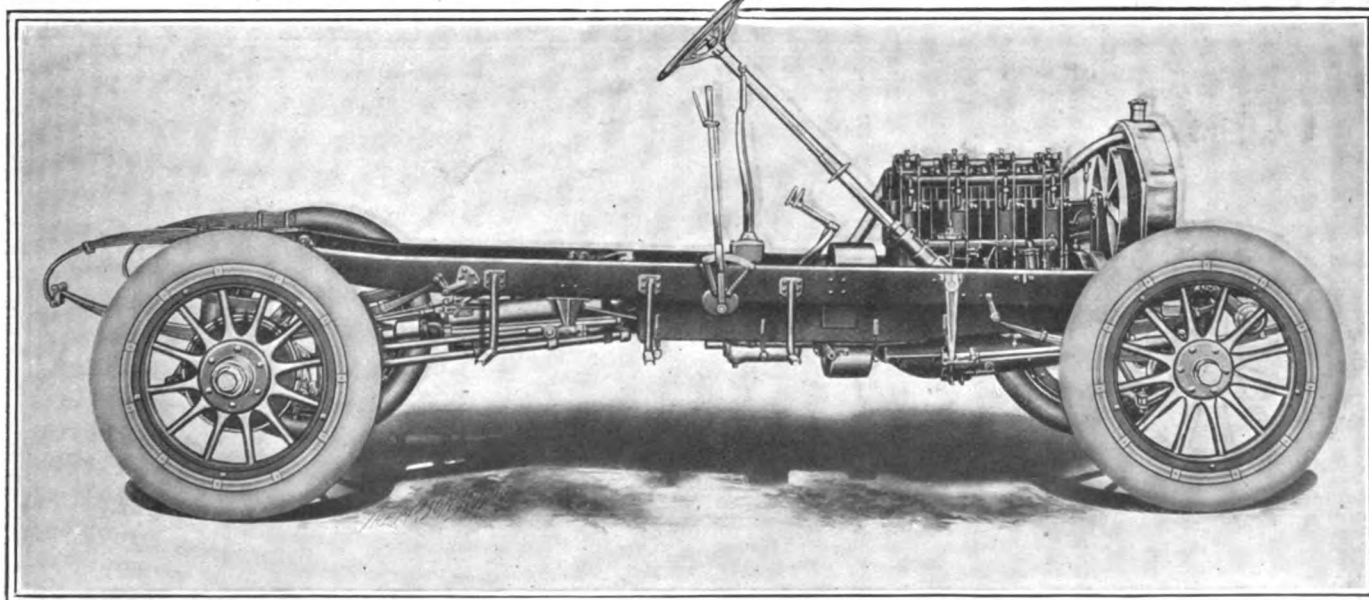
Chassis used in connection with the Knox four-cylinder, long-stroke motor
